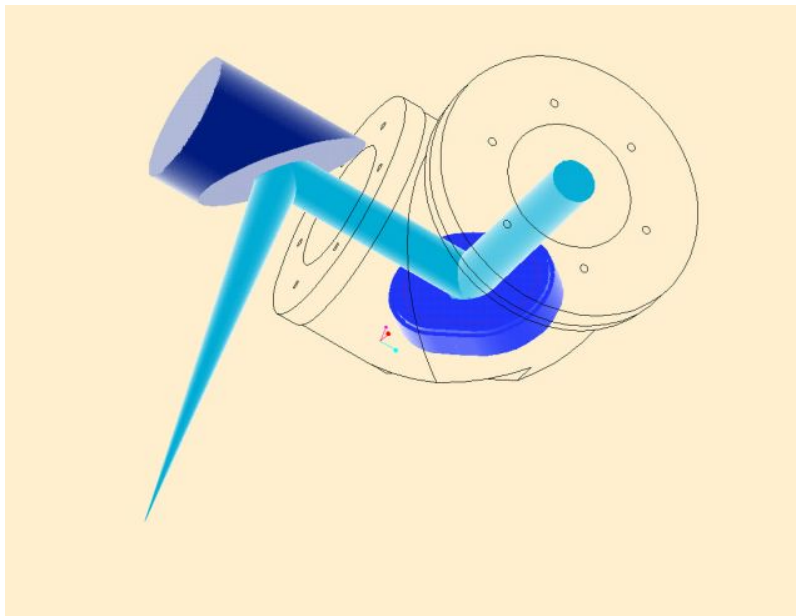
Single Spot Laser Mirror System for Robotic CO₂ Laser Welding (Trumpf)
